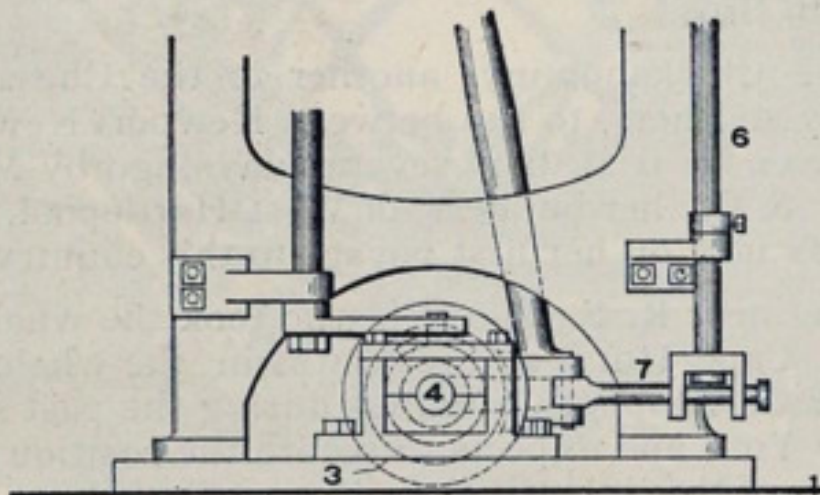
Valve Gear—View at Right Angles to Fig. 6.
